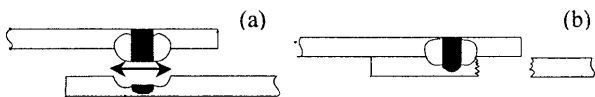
Schematic illustrations of fatigue fracture morphology (T6 treated): (a) High applied load, (b) Low applied load.
